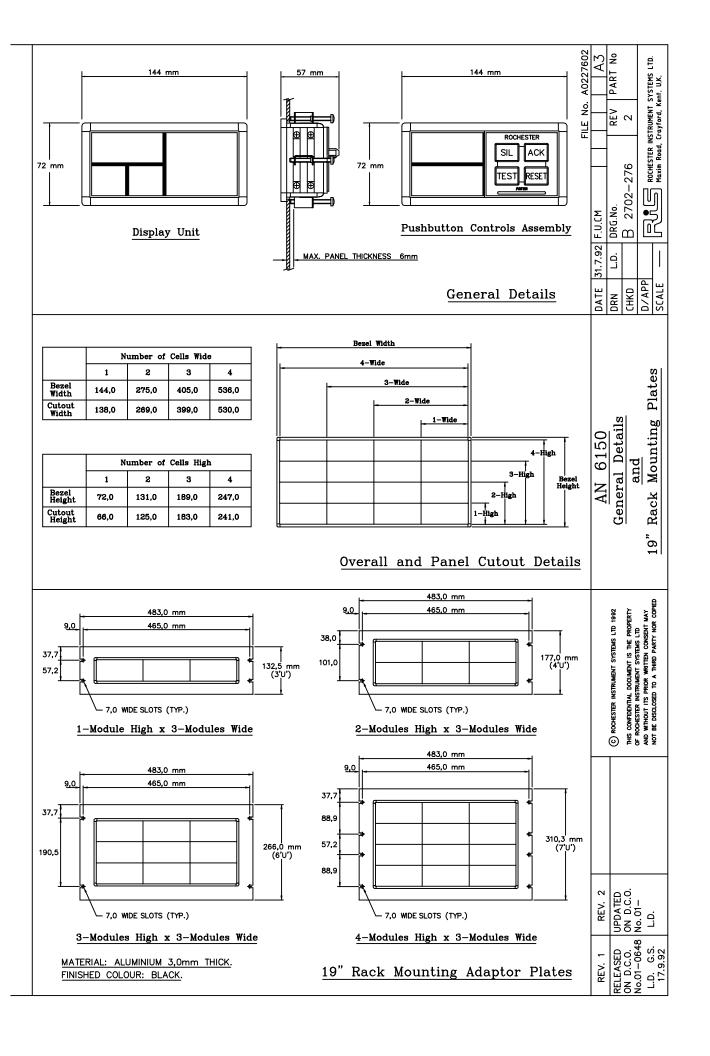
General Details and 19" Rack Mounting Plates
